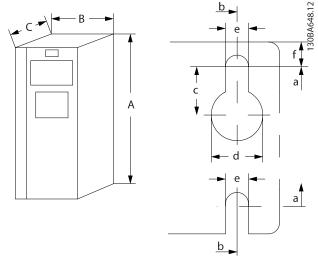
Top and Bottom Mounting Holes (See chapter 8.9 Power Ratings, Weight, and Dimensions)
